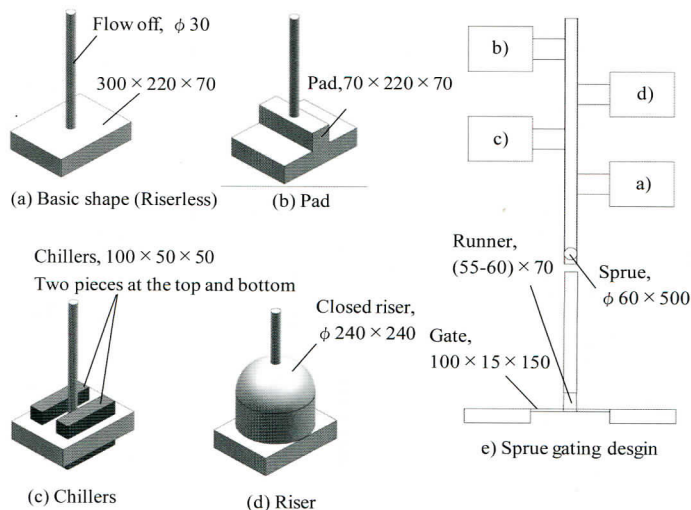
Casting design for plate test blocks. (Unit; mm) 供試材の鋳造方案.
